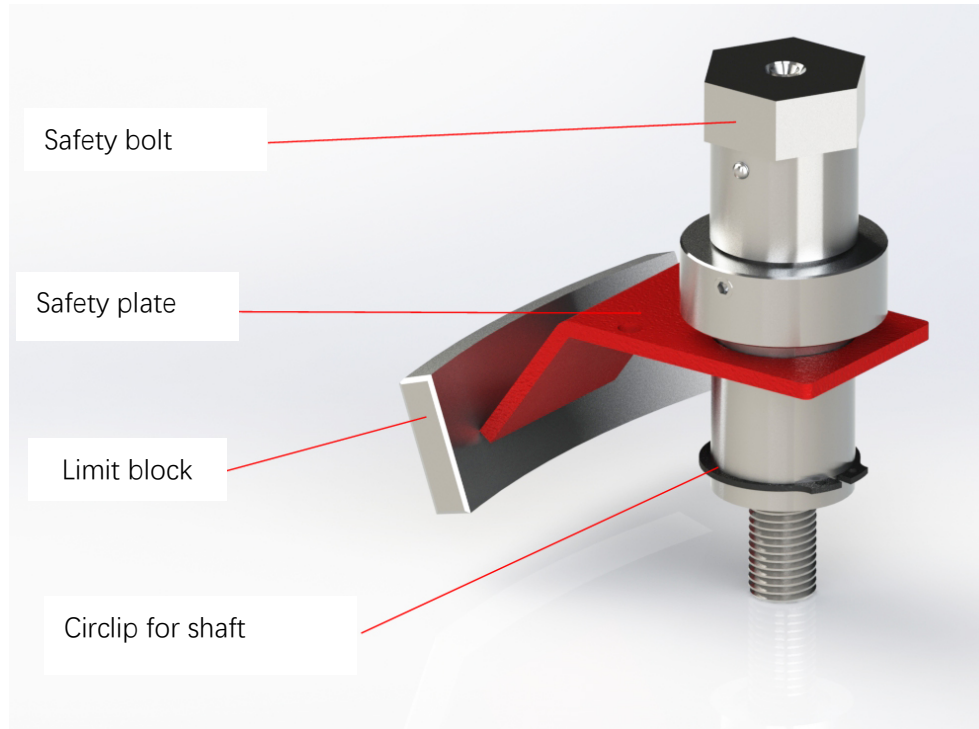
Pressure Ring Type Quick Opening Blind Plate Safety Interlock Device
